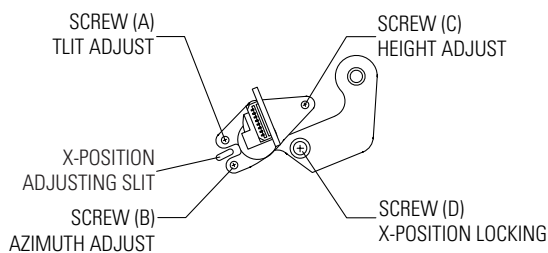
Location of ACE Head Adjustment Screw
